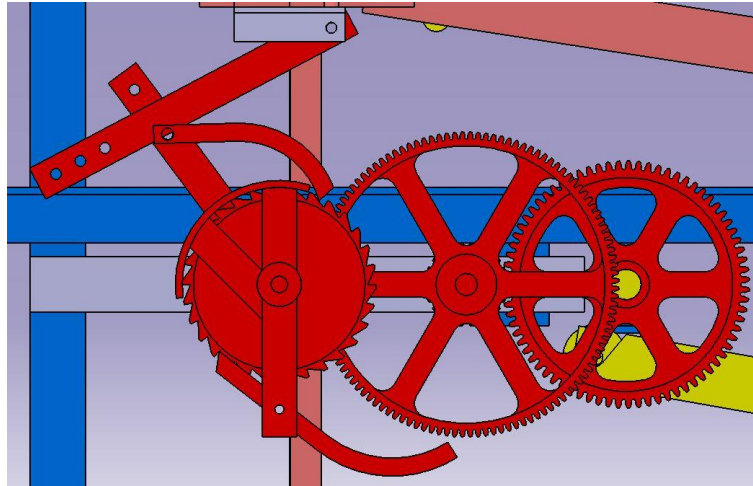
5-Wheel gear mechanism front view of Shanti loom
